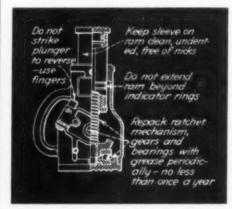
JOURNAL JACKS can be properly maintained by observing few rules relating to: (a) sleeve on ram, (b) indicator rings marking safe limit for extending ram, (c) reversing plunger, and (d) ratchet mechanism, gears and bearings, requiring periodic repacking with grease.
